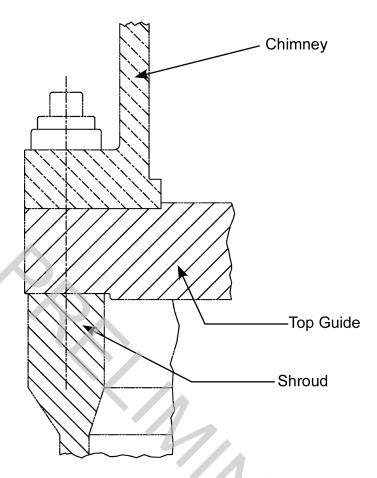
Typical Shroud, Chimney, and Top Guide Assembly
